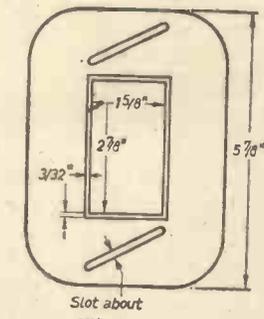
A SUITABLE BOBBIN FOR THE COILS
